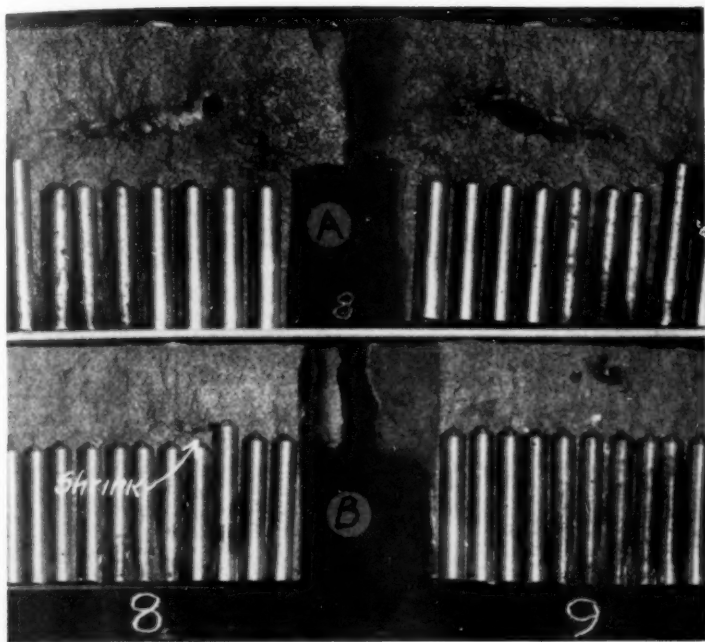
(A) VIEW OF CASTING No. 8 BROKEN THROUGH SECTION W-X OF FIG. 13B.
